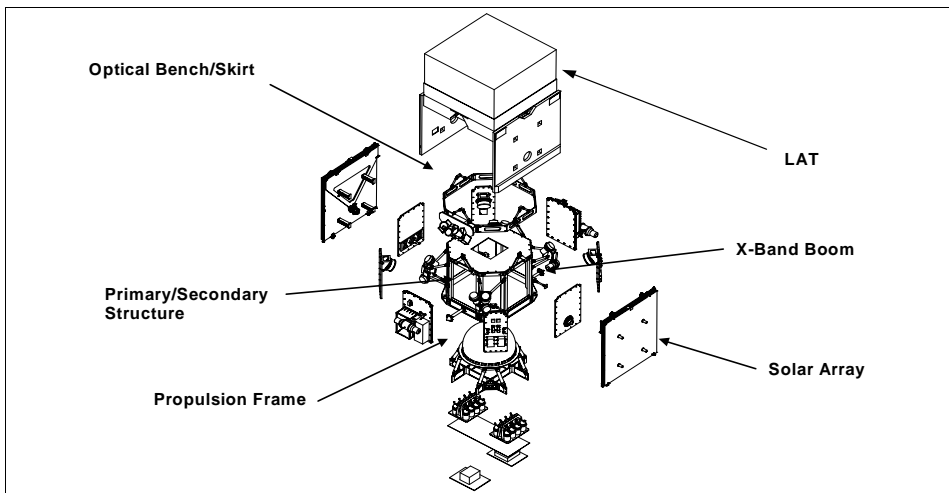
Exploded view – drawing of the GLAST spacecraft.
